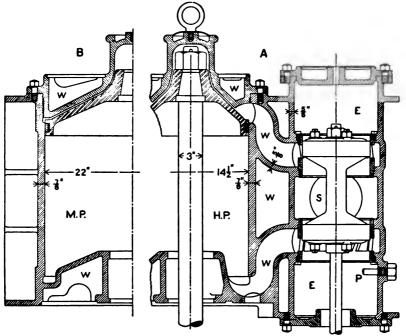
Details of Gunboat-engine Cylinders, Fig. 259. Scale 1 to 12.
